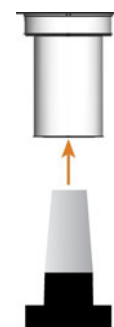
CLEANING THE INNER CONE OF THE SPINDLE
